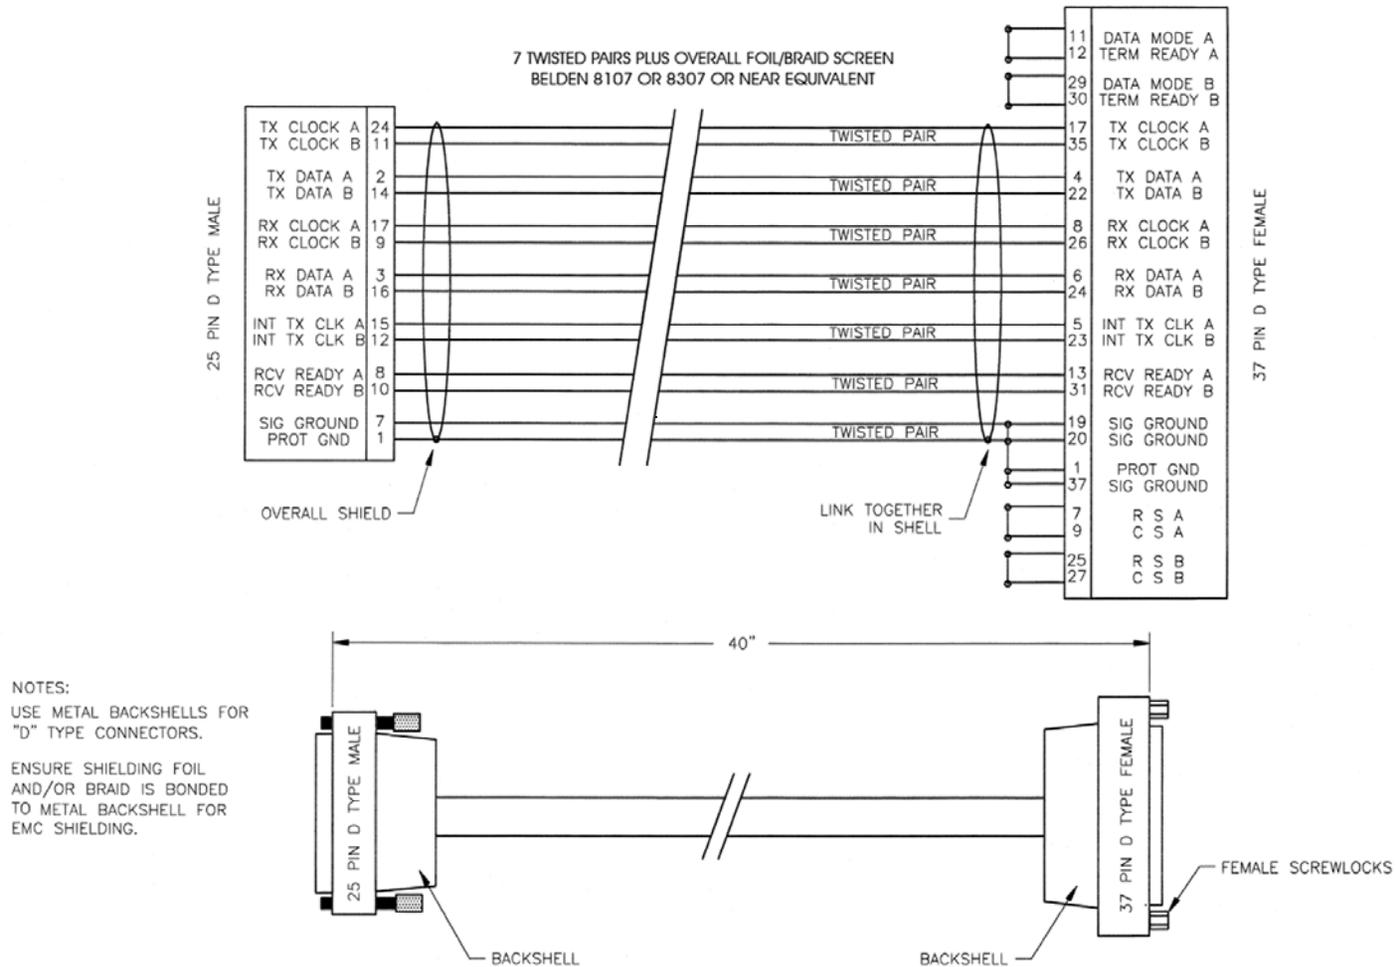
EIA-530 to RS-422/449 DCE Conversion Cable (CA/WR0049)
